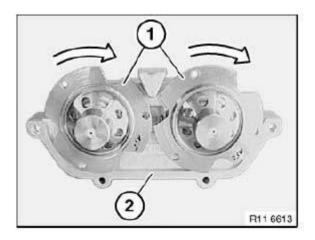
Identifying Thrust Bearing Plates Courtesy of BMW OF NORTH AMERICA, INC.
